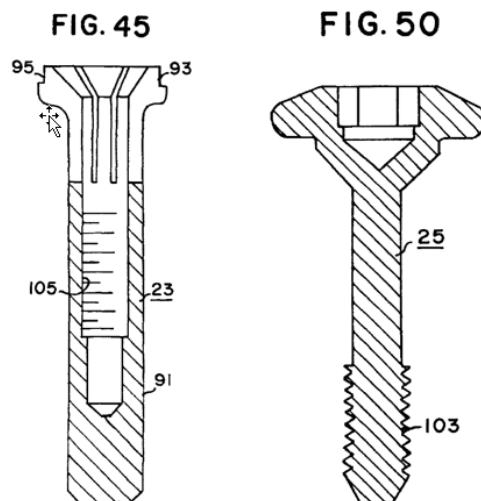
is a sectional view of buttress pin shank 23, and Figure 50 is a sectional view of pin head 25. *Id.* at 4:5–23, 8:63–67. In use, pin shank 23 is inserted into hole 57 or 63 of plate 13, until the flange of collar 93 is caught
